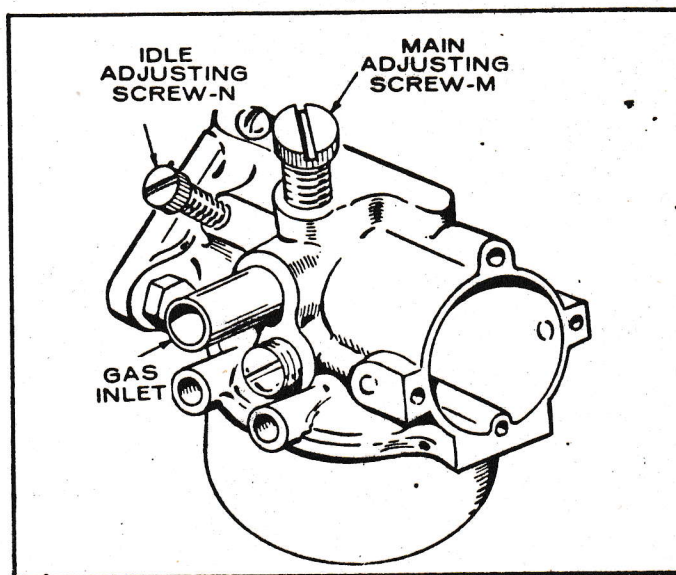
GAS CARBURETOR ADJUSTMENT
